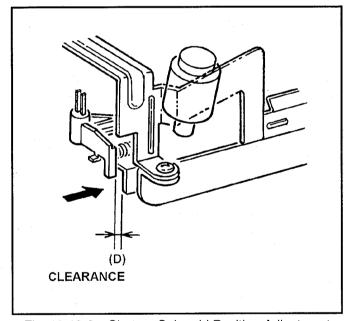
Cleaner Solenoid Position Adjustment
